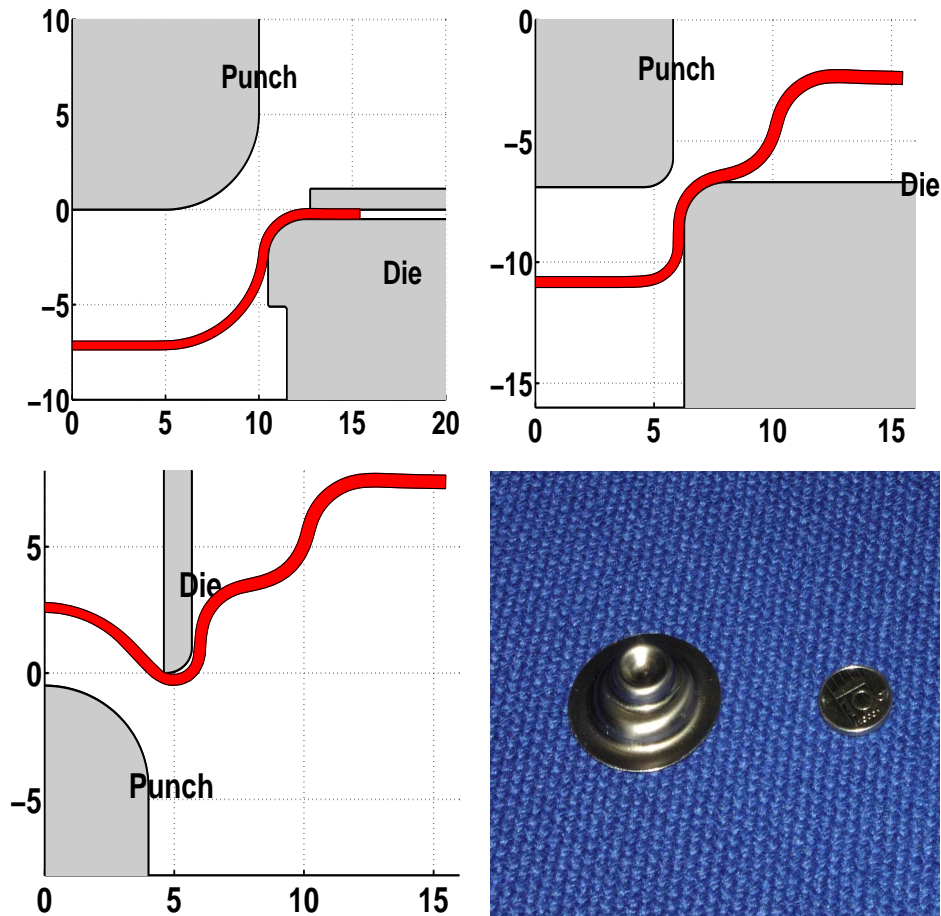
The example process, top left: step 1; top right: step 2; Bottom left: step 3. Dimensions in mm. Bottom right: photographic image of the product. All cross-sections are made at the end of the process.
